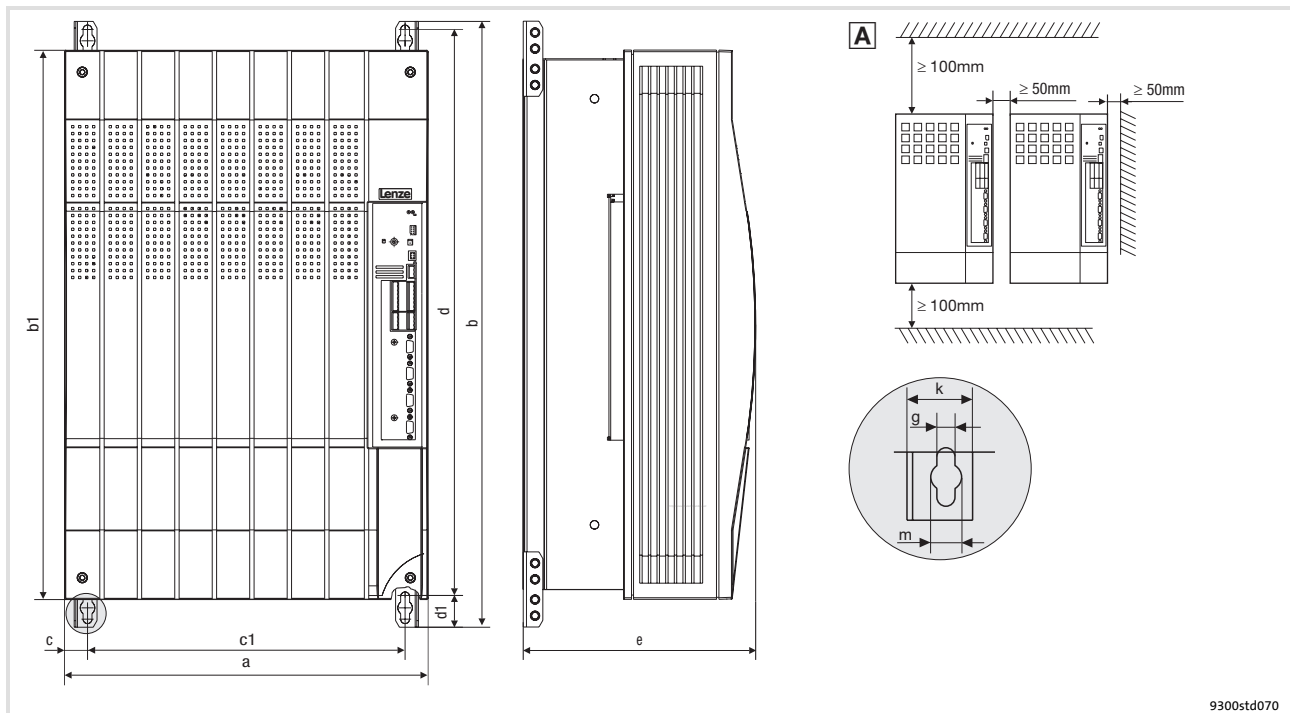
Standard mounting with fixing brackets 55 ... 75 kW
